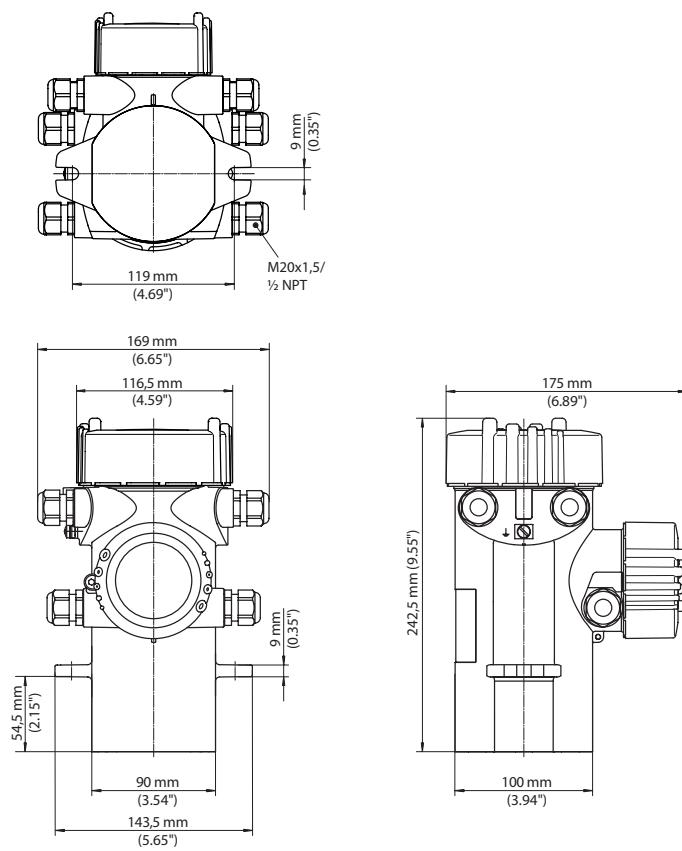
Aluminium housing or stainless steel housing - Precision casting
